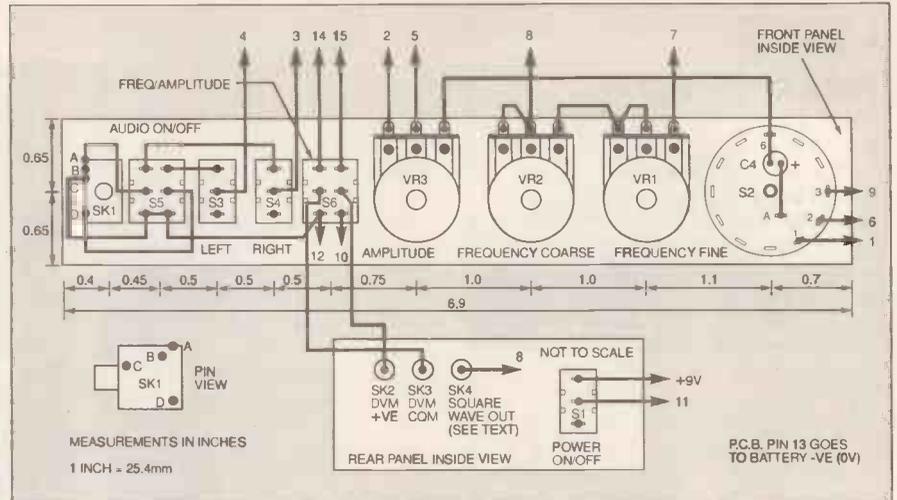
Drilling and wiring details for the Hearing Tester front and rear panels.
